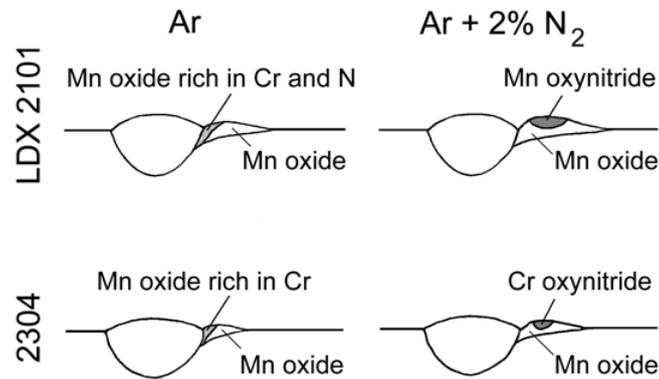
Proposed weld oxide composition for LDX 2101 and 2304 welded with and without nitrogen additions to the shielding gas .
